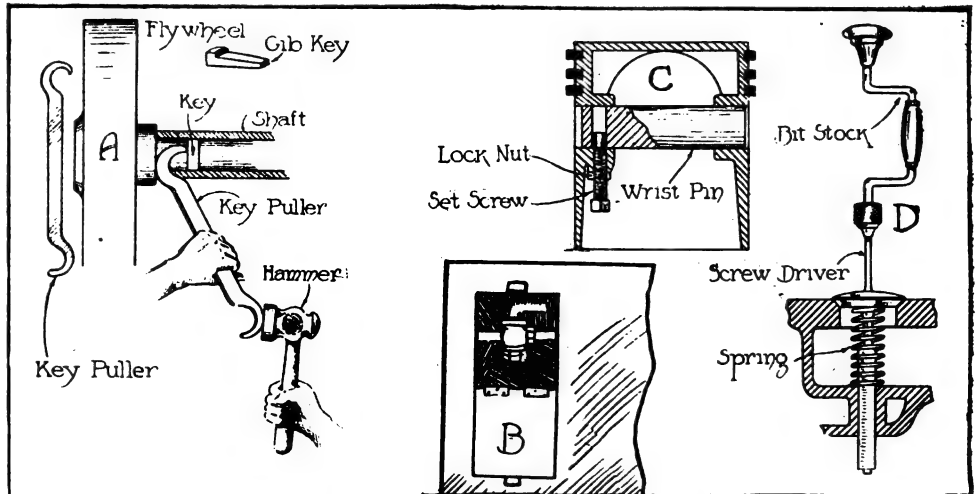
A, Convenient Tool for Removing Fly wheels; B, Making Fuel Cock Accessible; C, One Means of Retaining Wristpins in Pistons; D, Handy Assembly for Grinding Valves.
